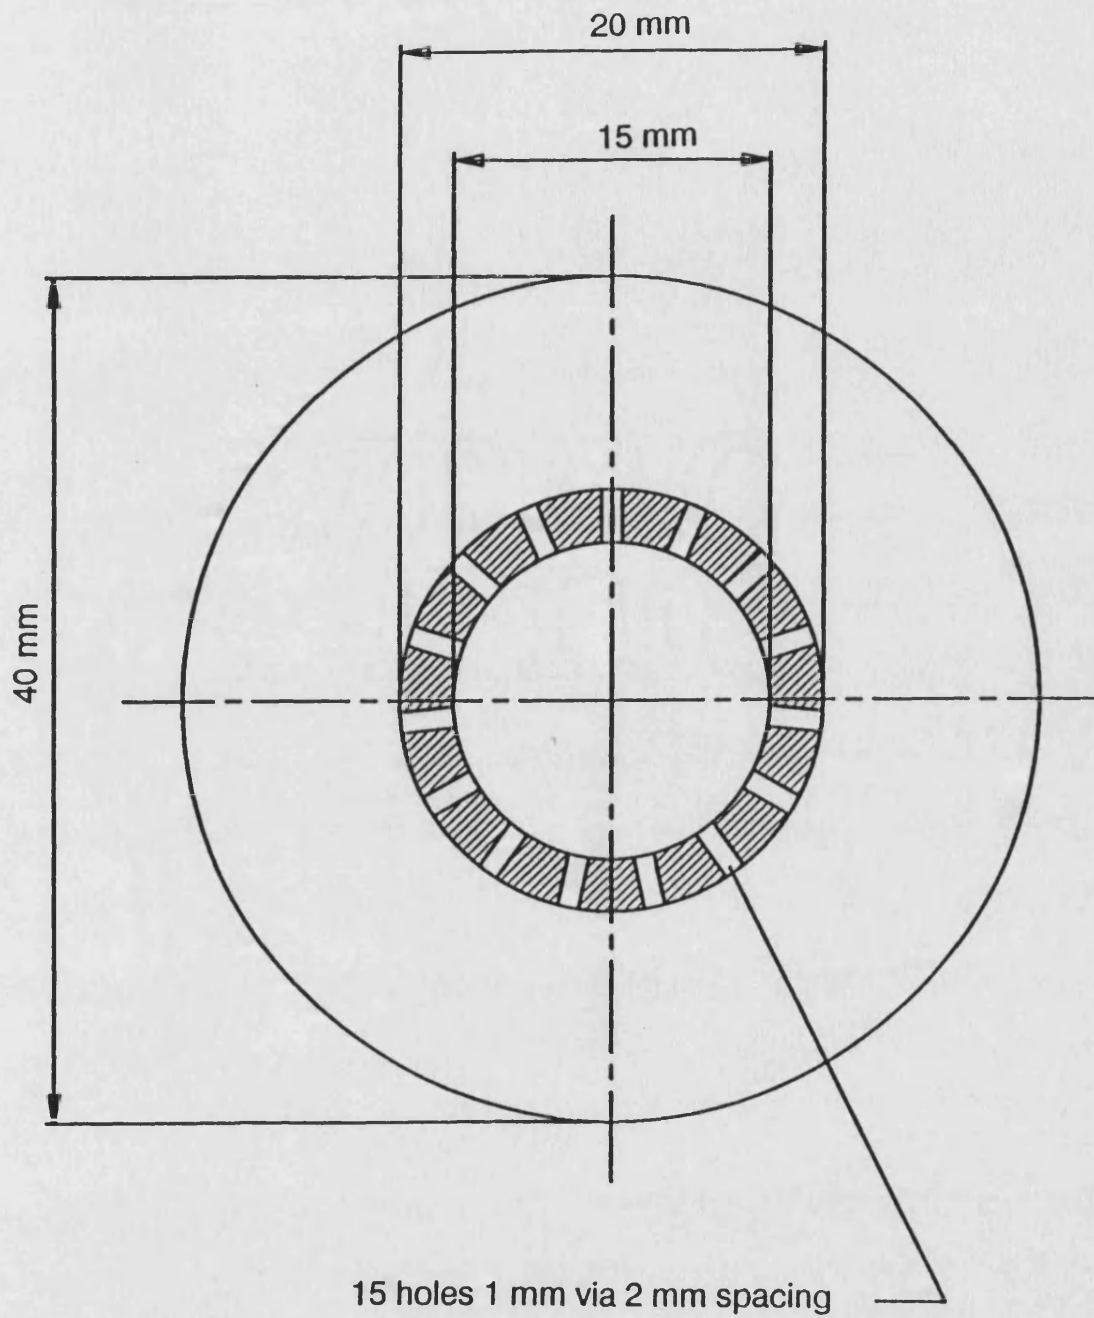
View B-B in Figure 3.5, illustrating the position of the holes
